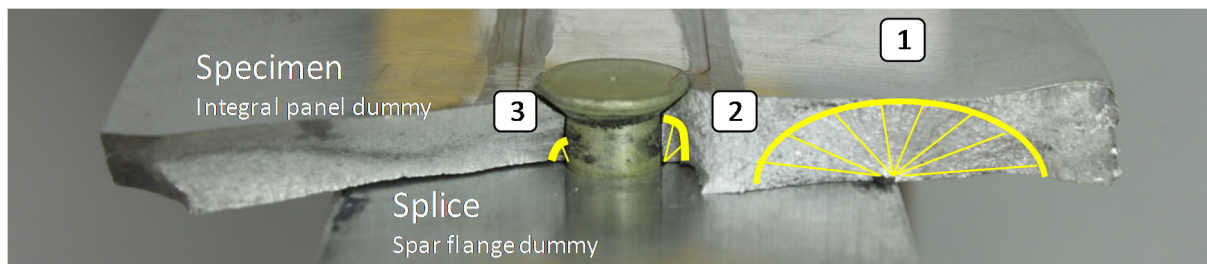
Fatigue cracks in the specimen; yellow colour marks the visually visible crack fronts
